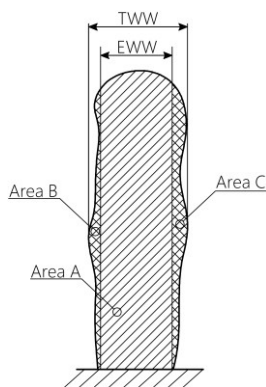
Definitions of Effective Wall Width and Total Wall Width. Adapted from [3].
